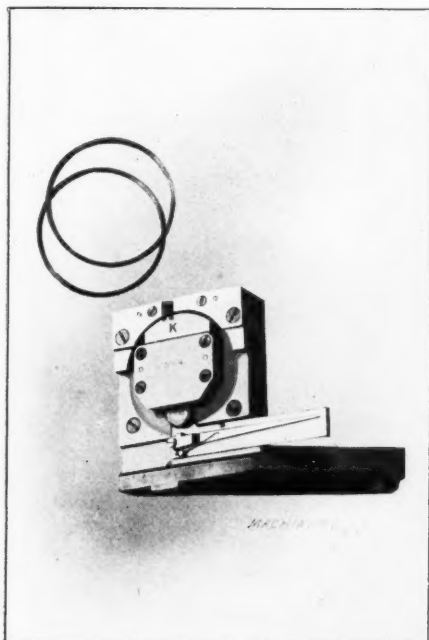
Tool formerly used for Locating the Thinnest Part of the Rings prior to Splitting
